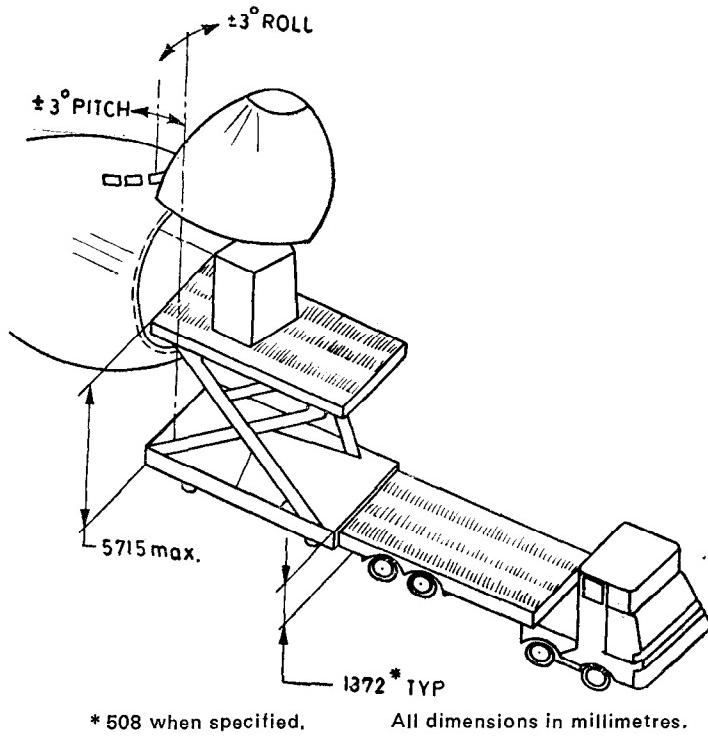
LOADER INTERFACES (AIRCRAFT FRONT DOOR SHOWN-SIDE DOOR SIMILAR)
